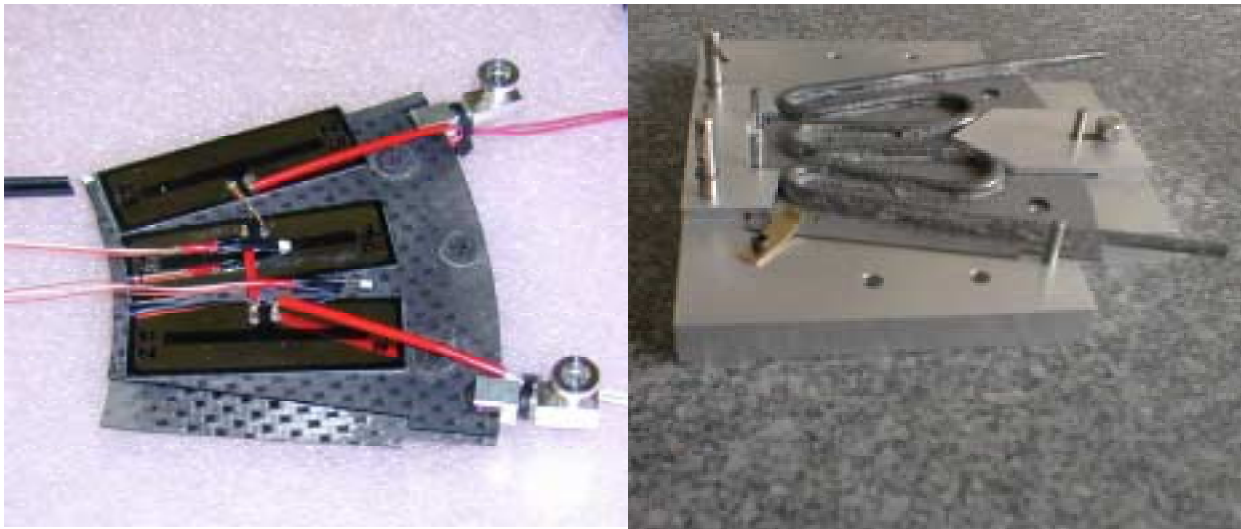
Left inset is photograph of a completed sector with a carbon-carbon sealed tube. The right inset illustrates the C-C tube bonded to the first faceplate, an initial step in the assembly process.
